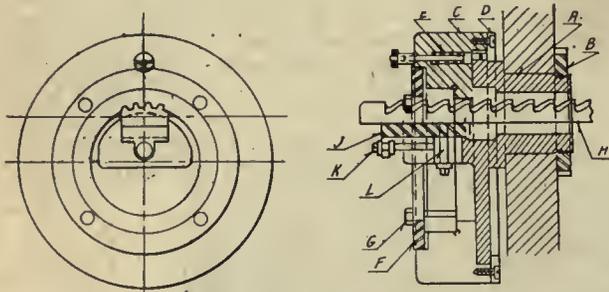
METHOD OF BROACHING AN INTERNAL GEAR.
